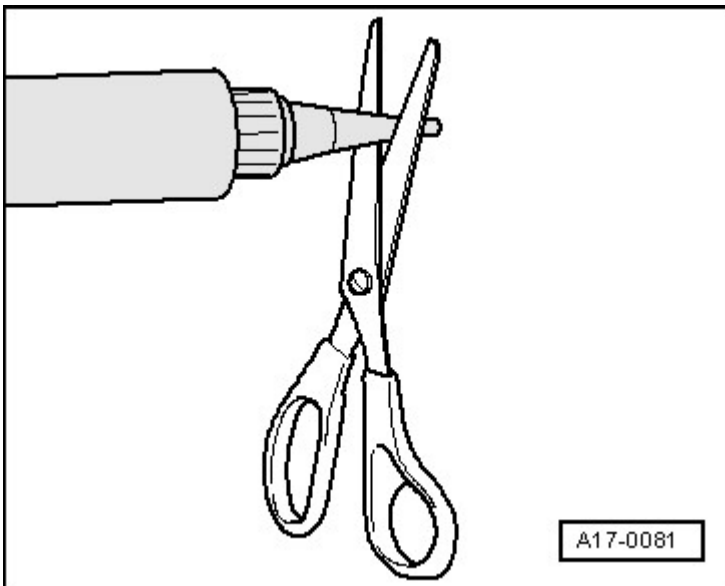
Cut Tube Nozzle At Front Marking (Nozzle Diameter Approx. 3 Mm)
